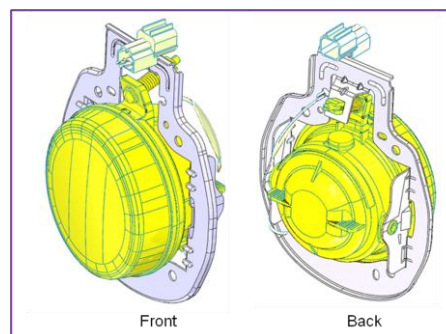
Lighting module assembled to Fog-lamp bracket.
